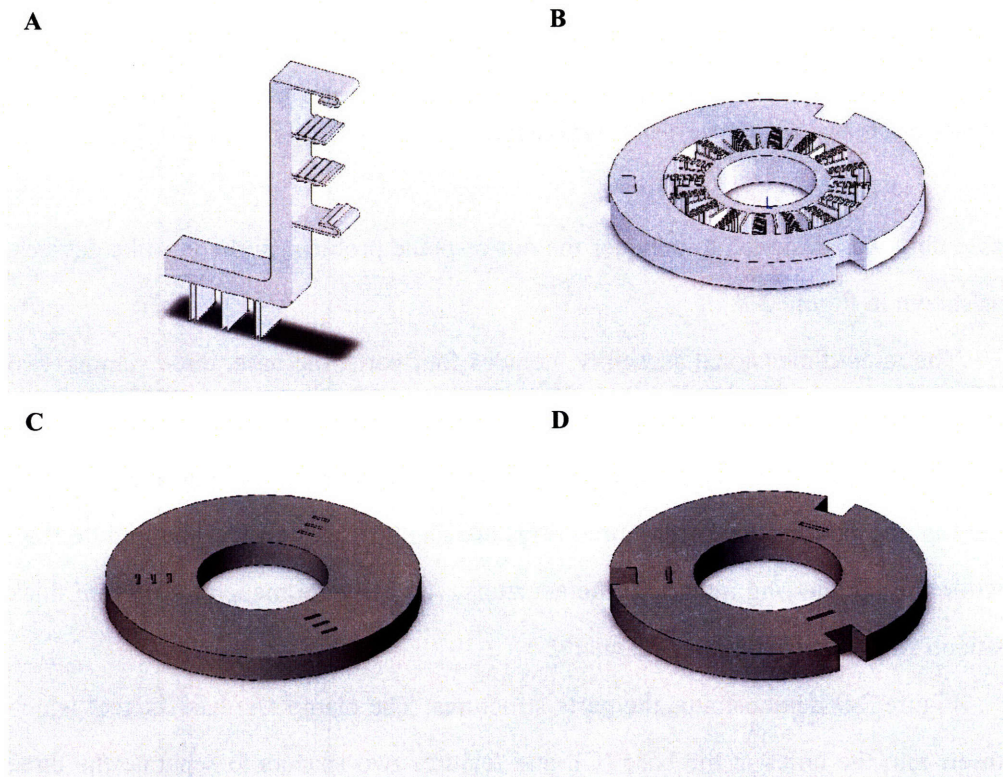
Schematic view of the three-dimensional assembly parts (A: clamp, B: middle ring, C: base, D: protective ring.)
